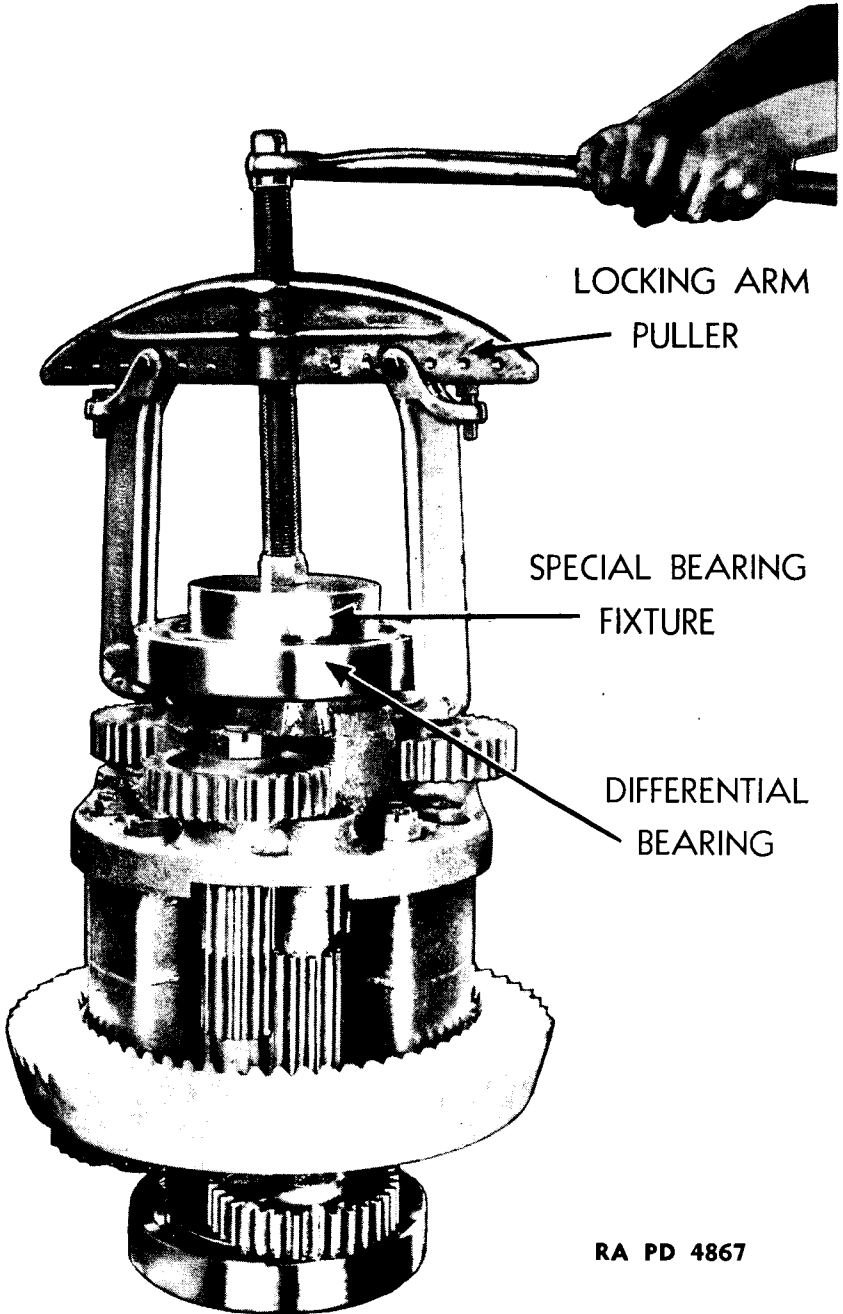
REMOVING DIFFERENTIAL BEARING
